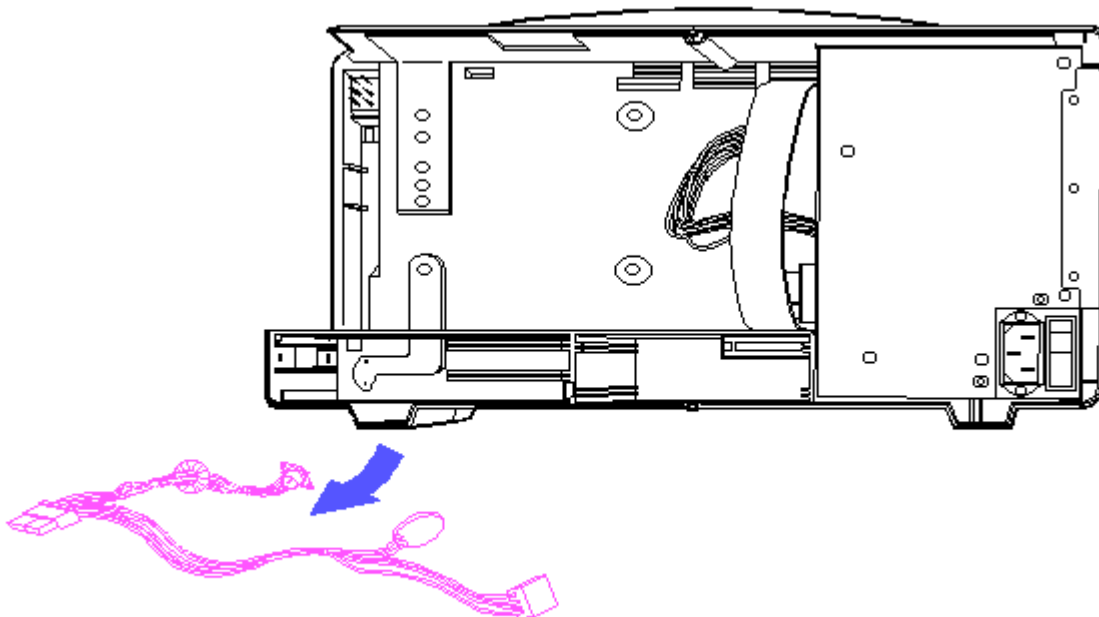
Removing the LED/Speaker and Keyboard Cables
